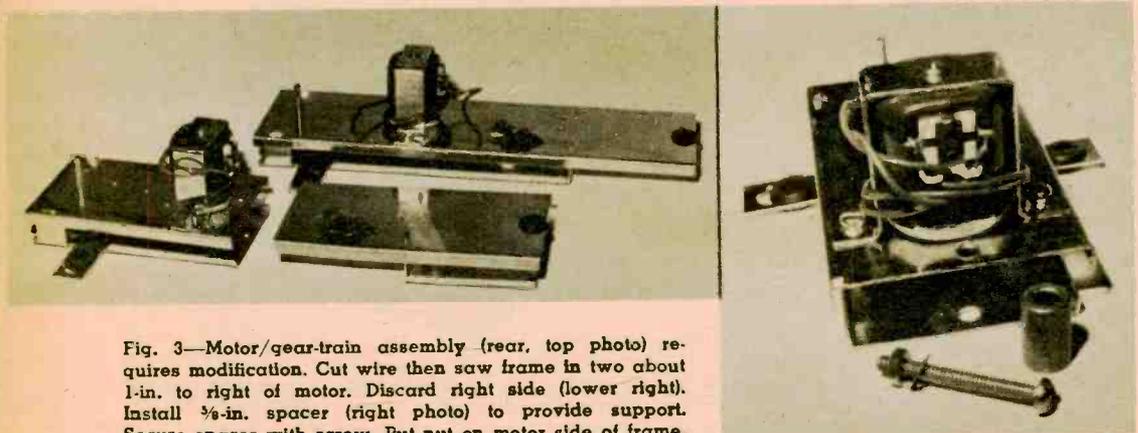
Motor/gear-train assembly (rear, top photo) requires modification. Cut wire then saw frame in two about 1-in. to right of motor. Discard right side (lower right). Install ⅛-in. spacer (right photo) to provide support. Secure spacer with screw. Put nut on motor side of frame.
